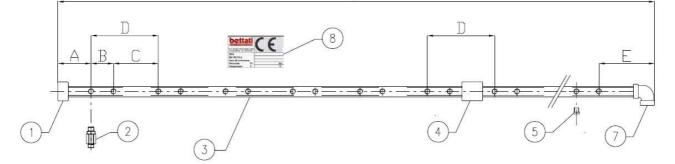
Manifolds for 80L cylinder rack, without directional valves
